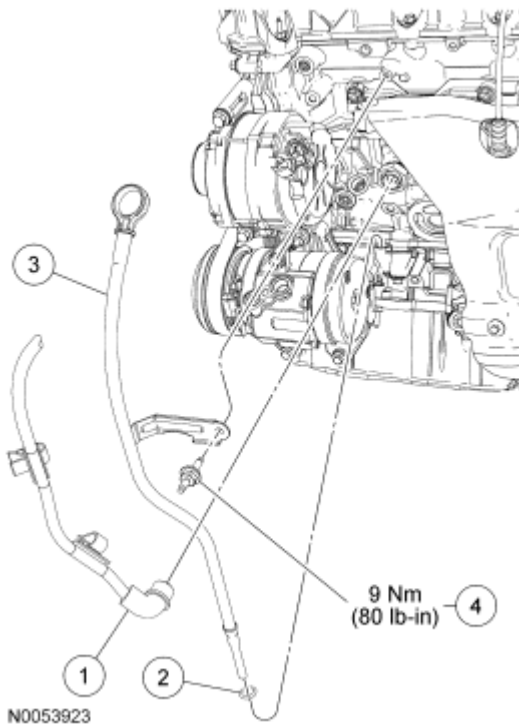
Exploded View Of Oil Level Indicator & Tube With Torque Specification
